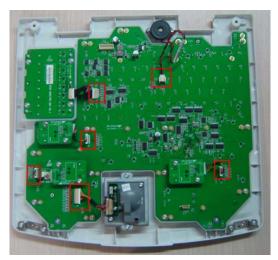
Disassembly of Control Panel and Silicon Rubber Keypad (2)
